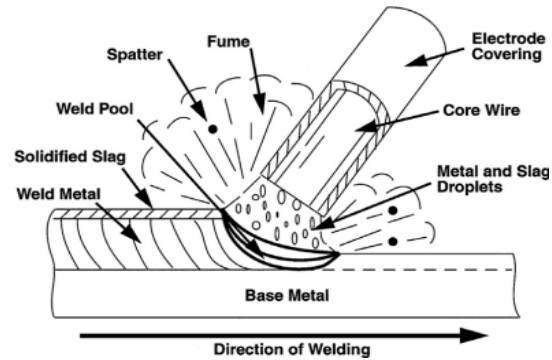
Shield metal arc welding process (American Welding Society, 1991)
